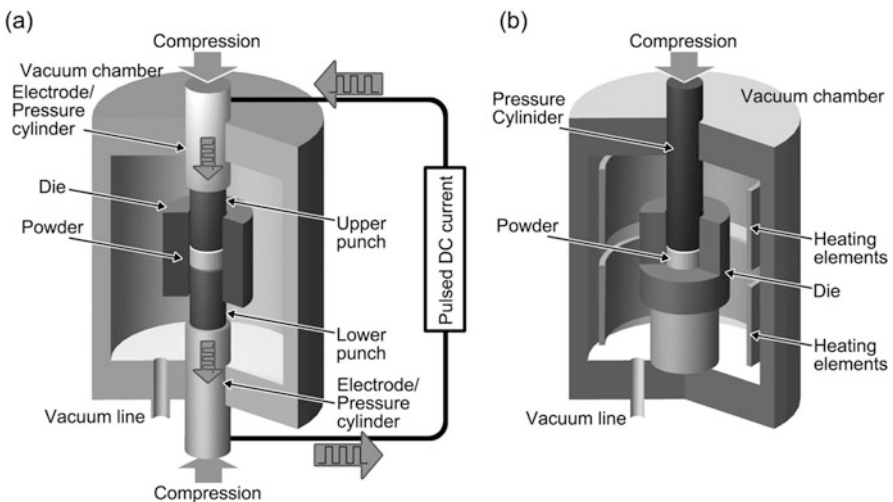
A schematic of (a) typical apparatus of spark plasma sintering (SPS) machine and (b) hot-pressing (HP) setup
